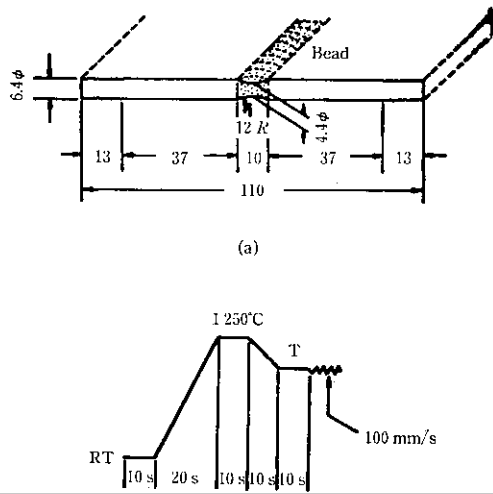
Shape and size of welded specimen (a) and heat cycle (b) in Gleeble type tension test after quick heating
